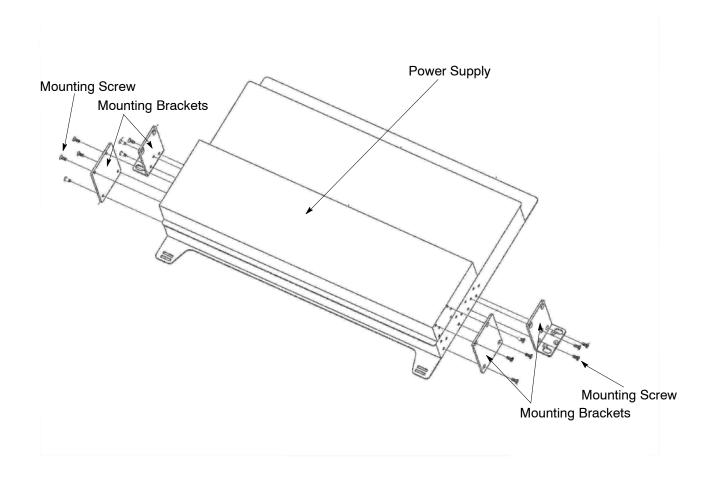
Power Supply to 360-80 ICB Mounting Kit
